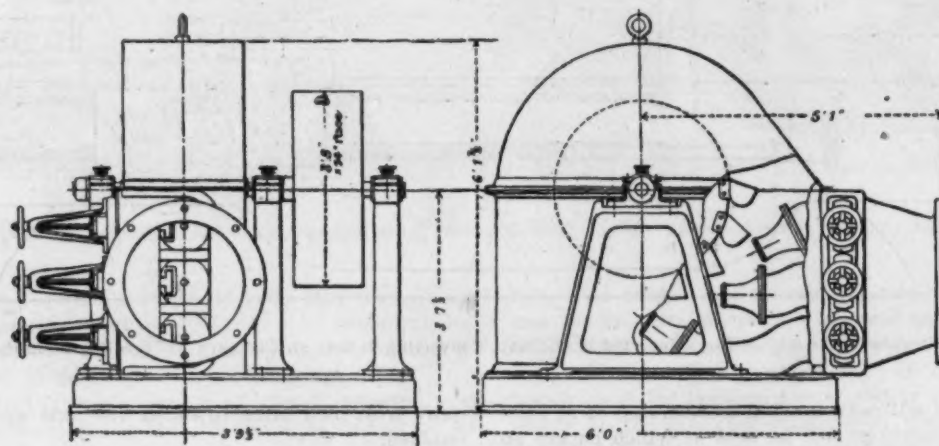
Line Elevations Giving the Dimensions and Showing the Arrangement of the Nozzles.
